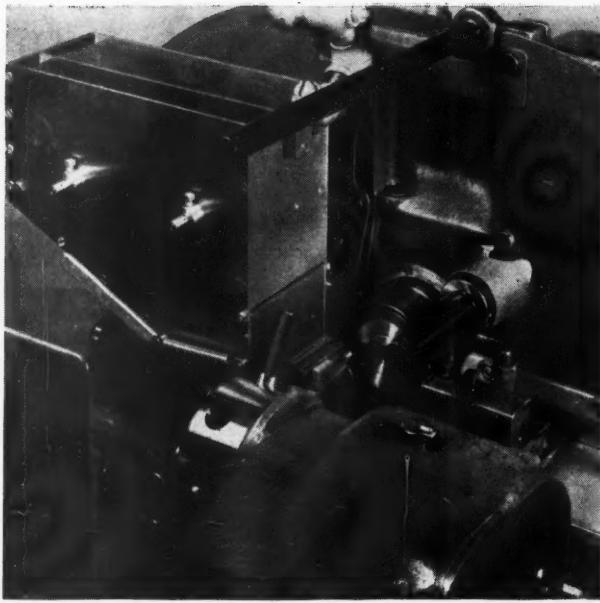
The partition in the magazine can be adjusted sidewise to accommodate parts of various lengths, ensuring that the part will be delivered within the required distance from the chuck nut on the spindle.
